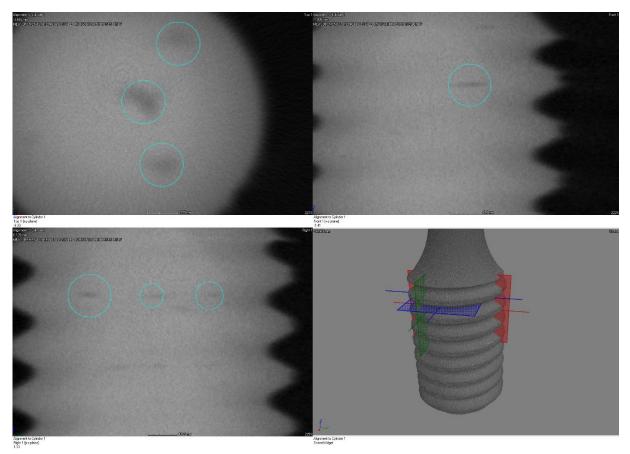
X-ray tomography of as-built PA samples manufactured using EBM indicating internal defects.
